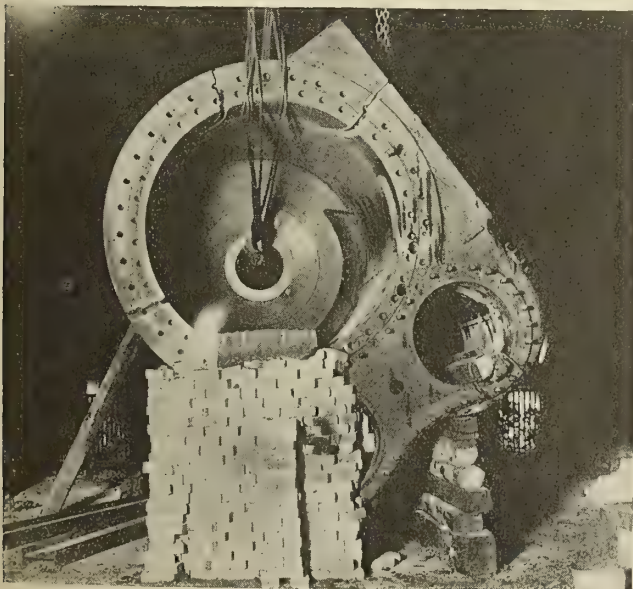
Preheating Crack in Low-Pressure Cylinder by Means of Charcoal Fire. Castings Handled by Crane
